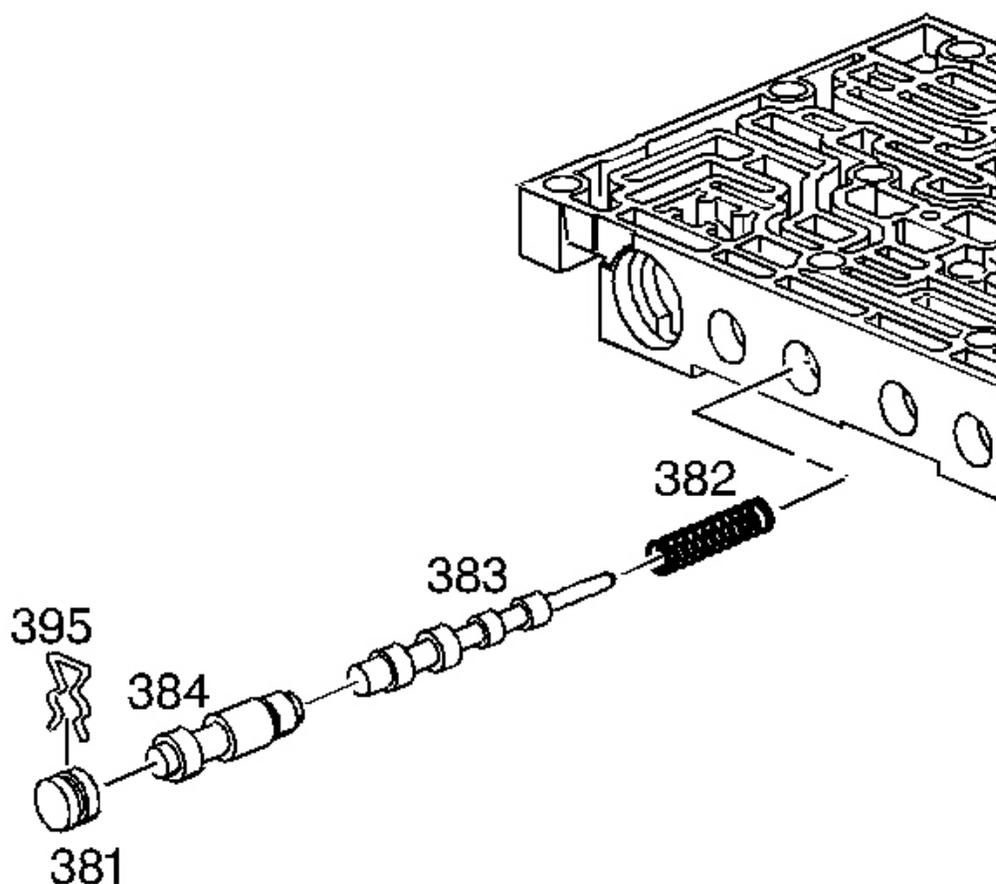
Bore Plug Retainer, Bore Plug, 3-4 Relay Valve, 4-3 Sequence Valve & 4-3 Sequence Valve Spring
